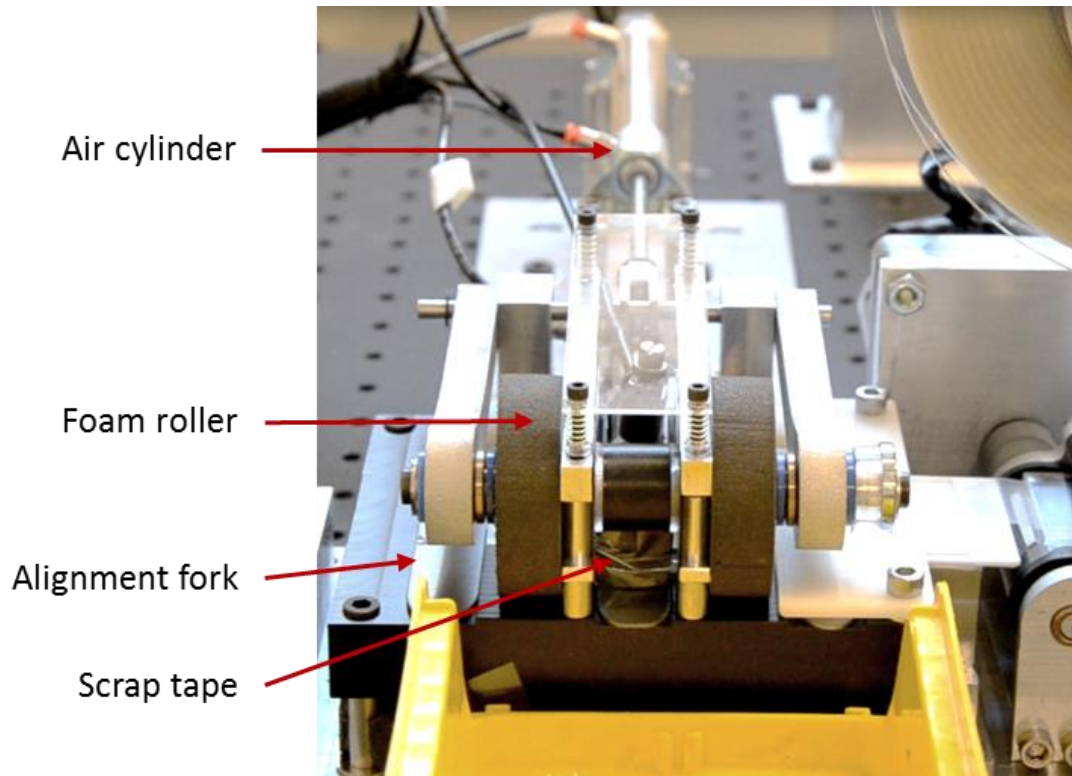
The completed cutting mechanism. The blade assembly, alignment fork, and attached shovel have moved forward, and the scrap tape has peeled up in front of the shovel head.
